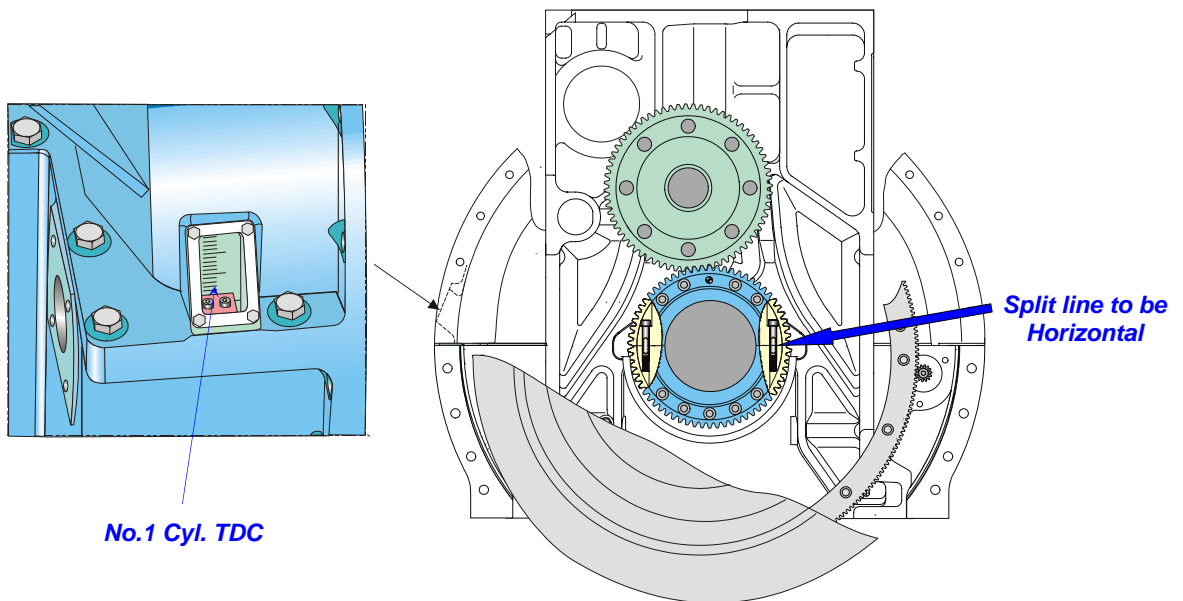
Check TDC mark on flywheel and crankshaft (플라이휠 및 크랭크 샤프트에 있는 상사점 마킹 확인)
